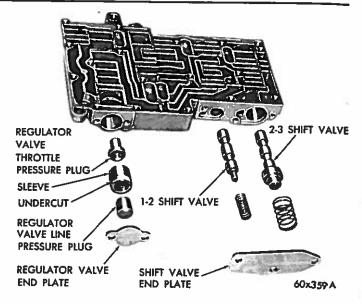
Valve Body-Shift Valve Side (Exploded View)
